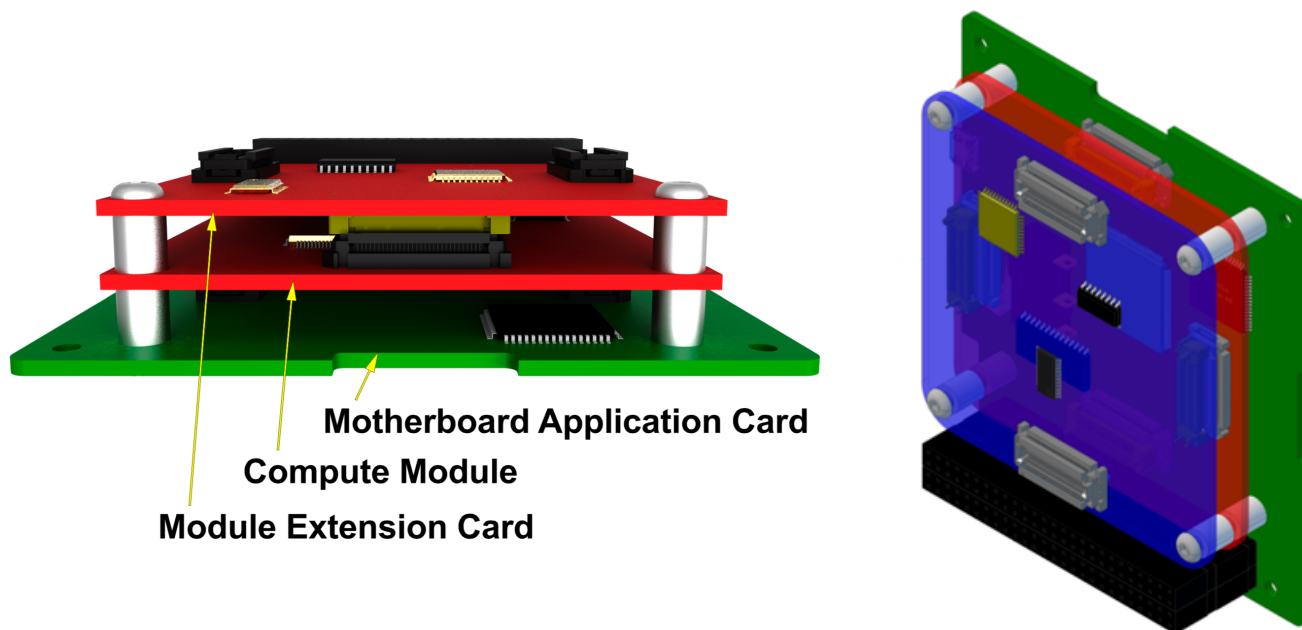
BOARD STACK DRAWING, FRONT VIEW (LEFT) AND ROTATED VIEW (RIGHT)
